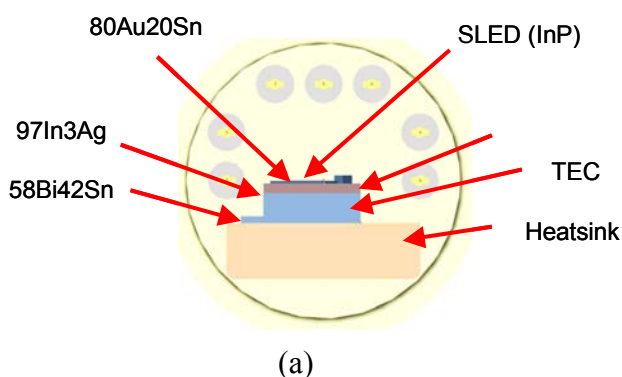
(a) Solder selected for integration of CoS-TEC-heatsink on header,
